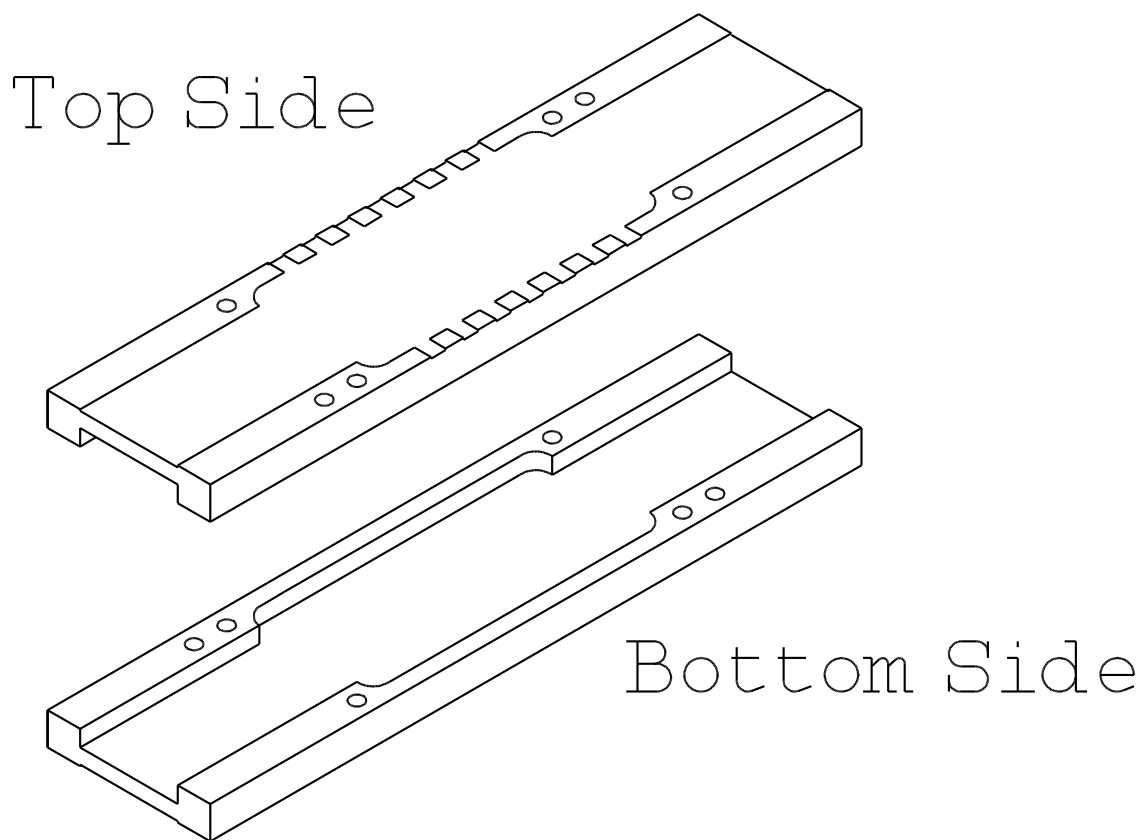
A schematic drawing of a tray for the 49-element array (Isometric View).
